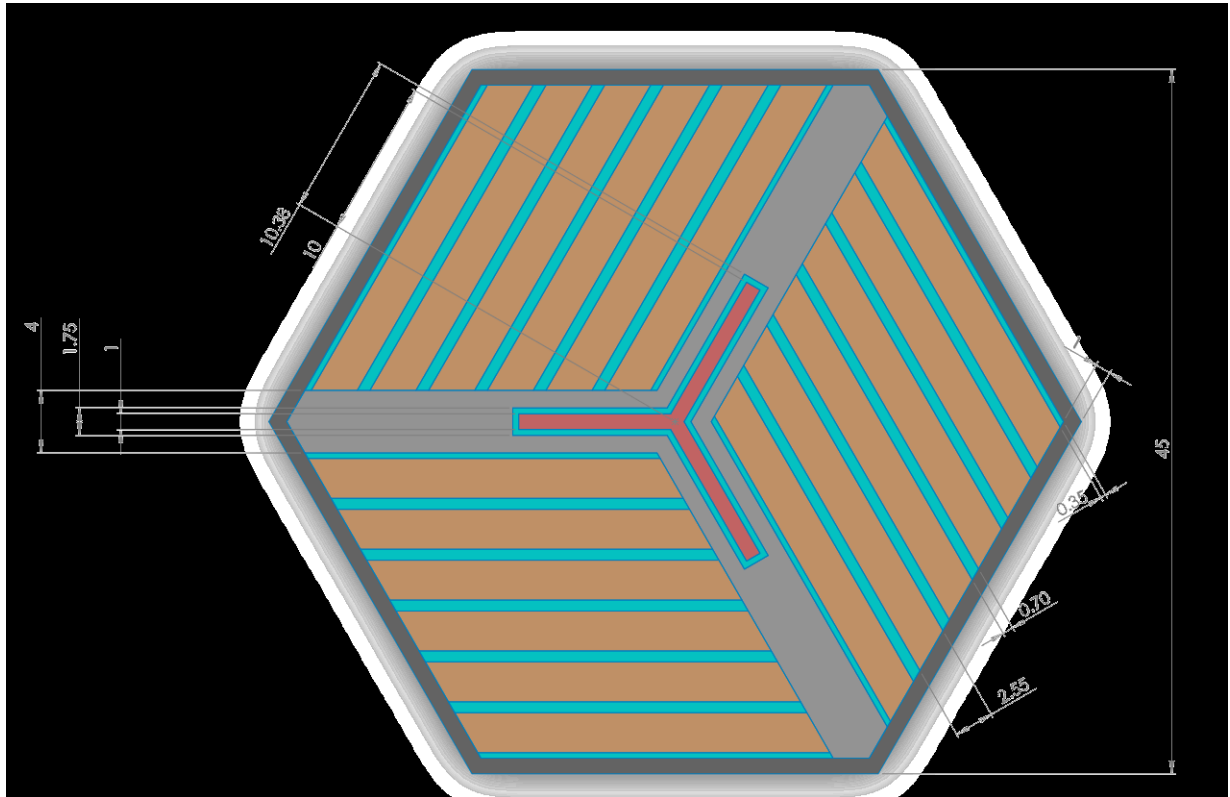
AHTR fuel assembly reference dimensions. (Varma, et al., 2012)
